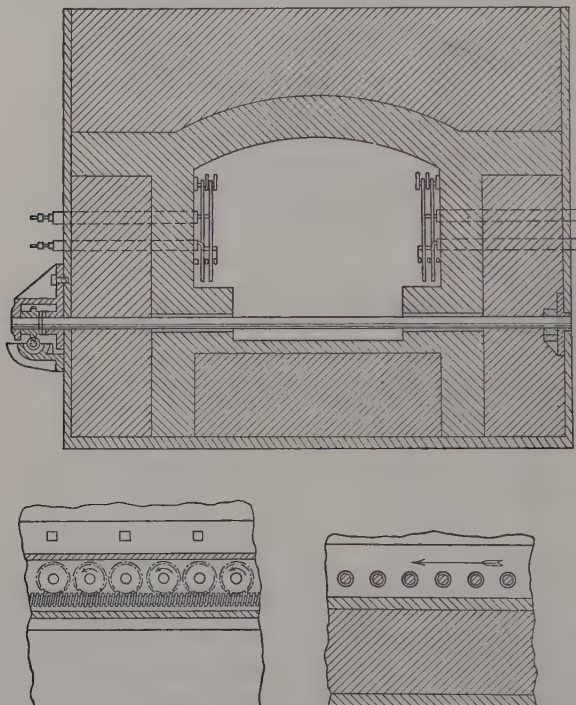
Roller conveyor in electrically heated furnace. The rollers are made of heat-resisting material.
